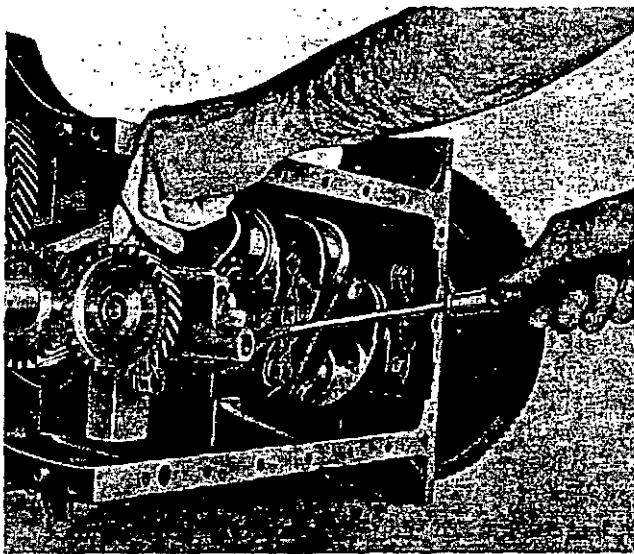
Alternative Method of Checking Crankshaft End Play with Feeler Gauge
